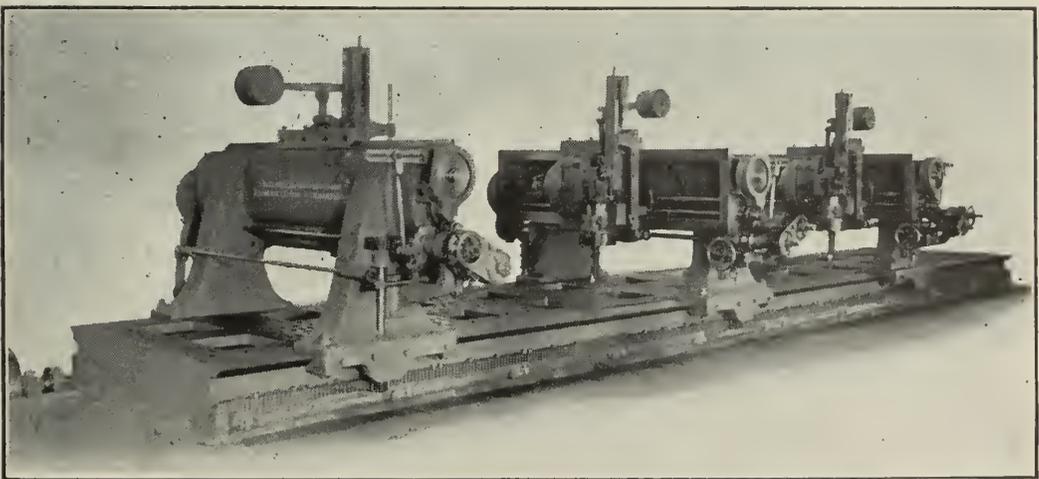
TRIPLE SLOTTING MACHINE FOR LOCOMOTIVE FRAME PLATES.
